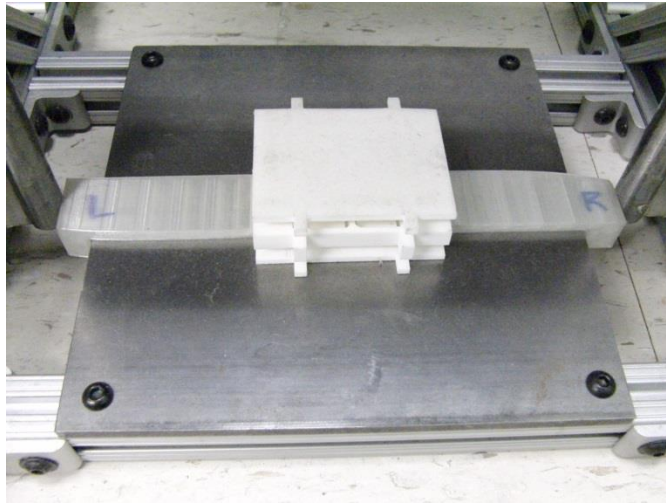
3D printed specimen attachment method, showing 3D printed clips labeled “L” and “R.”
